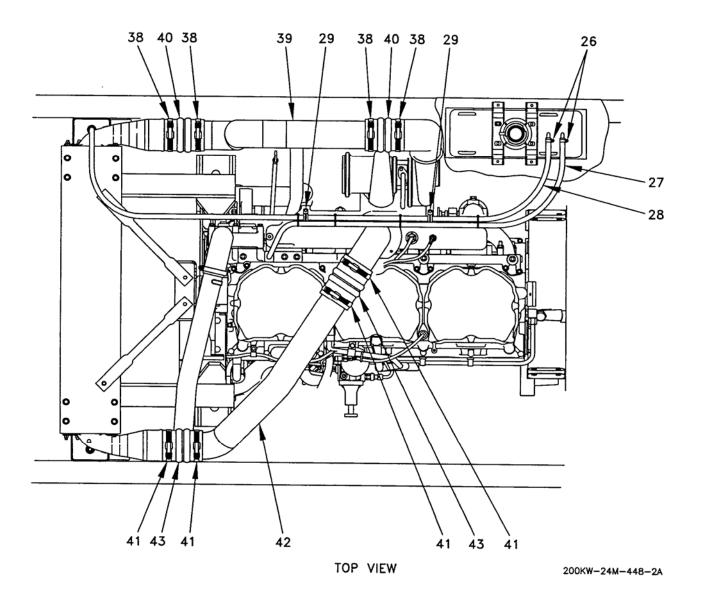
Coolant Hose Assemblies (Sheet 2 of 4).
